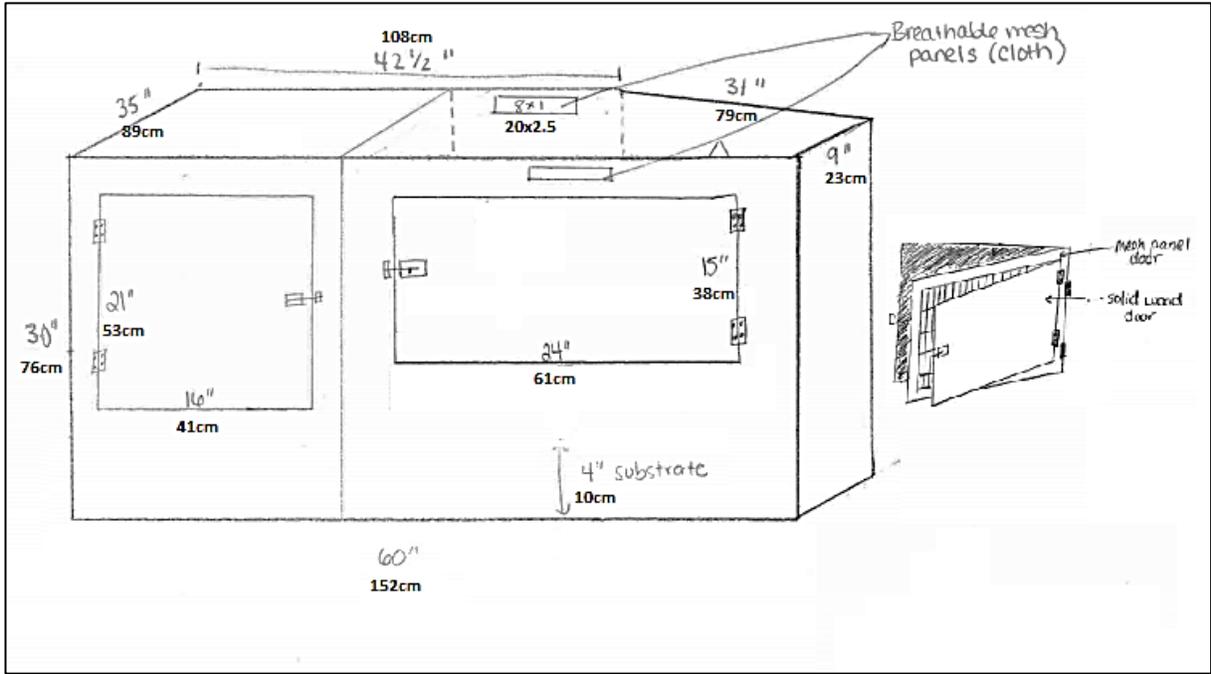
Side view of weathered hornbill nest box blueprints with detailed view of double access door.
